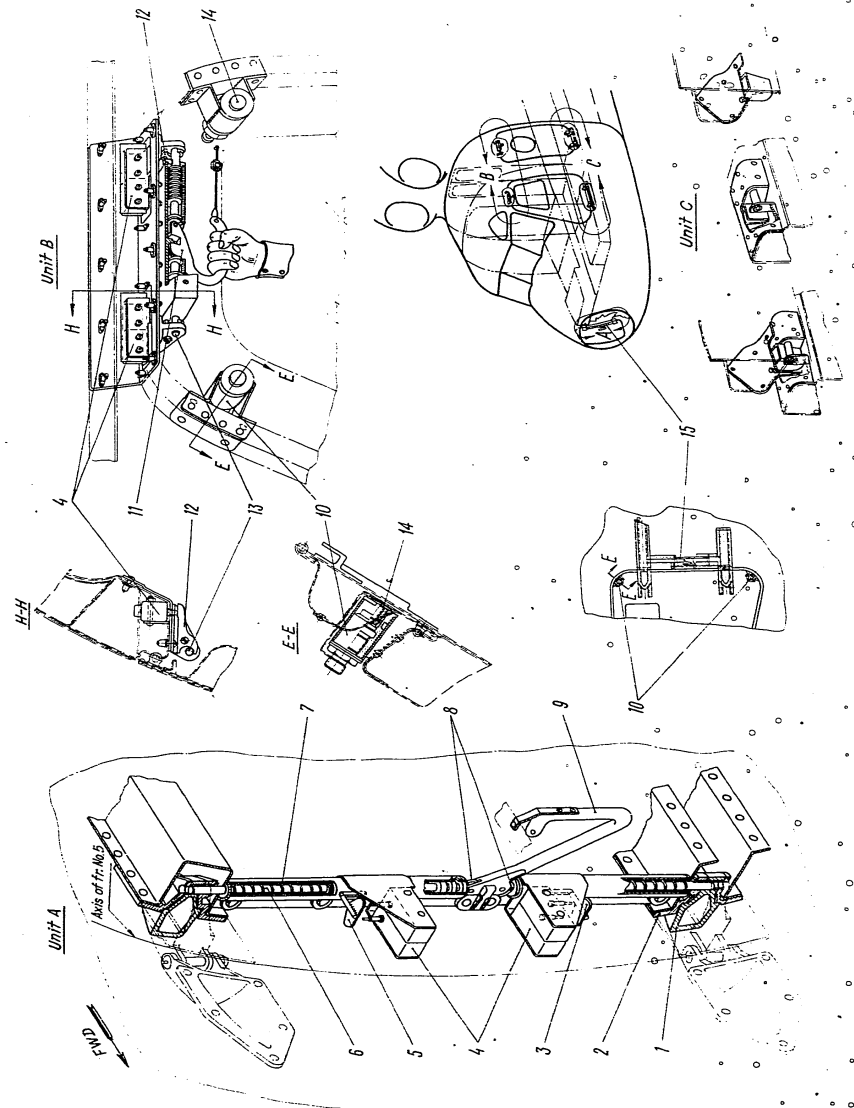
CREW'S CABIN DOOR EMERGENCY EJECTION MECHANISM (A802A). 1—door hinge; 2—bracket; 3—lower contact plate; 4—miniature switches A802A; 5—upper contact plate; 6—rod; 7—spring; 8—rollers; 9—navigator's cabin door emergency ejection handle; 10—door ejection gun; 11—pilots' and flight engineer's cabin door emergency ejection handle; 12—lever; 13—rod; 14—ratchet; 15—door emergency ejection mechanism.
